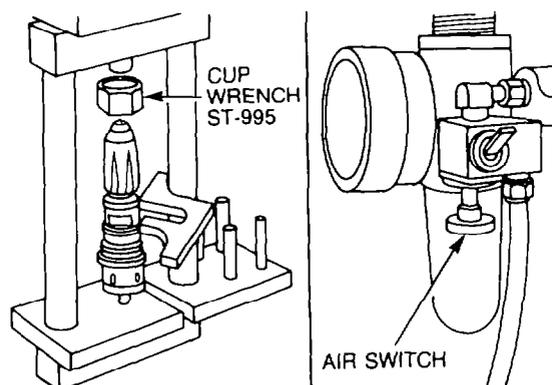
Injector Body Wrench and Cup Wrench — Installation
